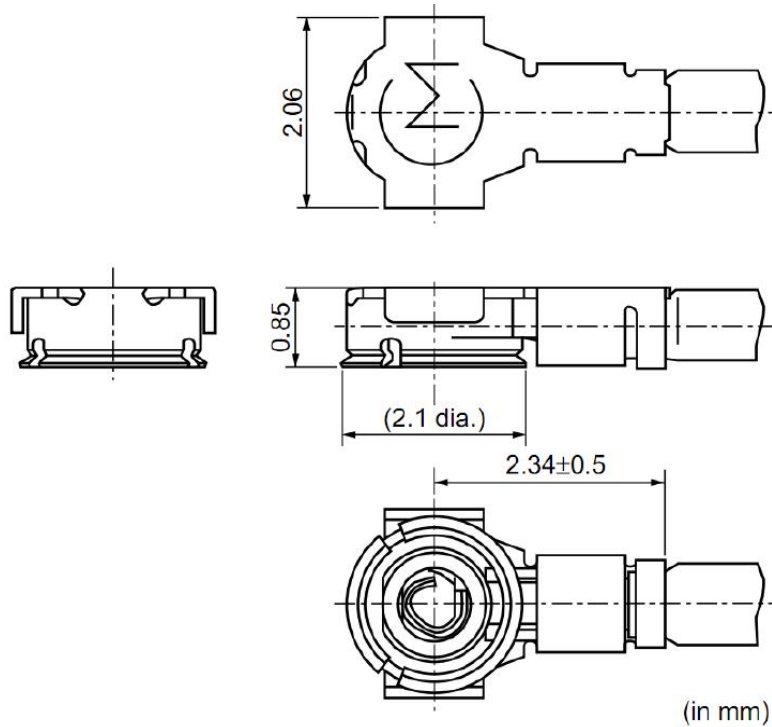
Dimensions of Mated Plugs (Ø 0.81 mm Coaxial Cables) (Unit: mm)
